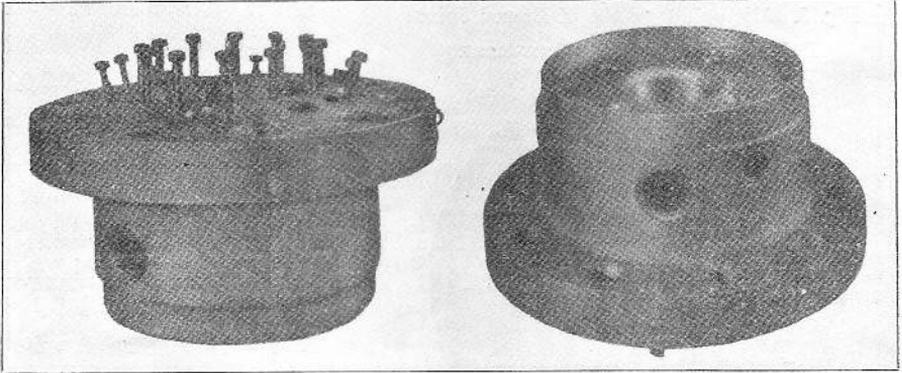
Brazed Wrought Iron Cylinder Cover after Machining.
